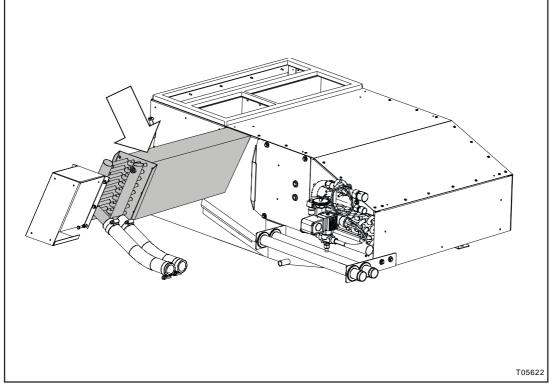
Exploded view of HVAC unit under driver's compartment floor (arrow shows heater coil)
